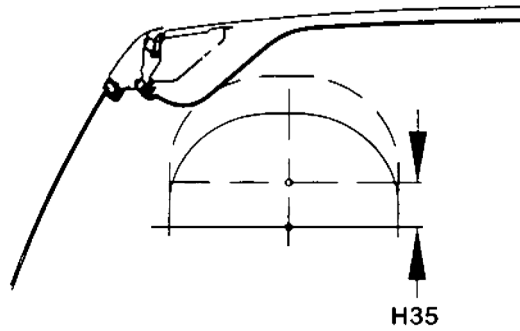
B—REAR VIEW HEAD CLEARANCE VERTICAL
